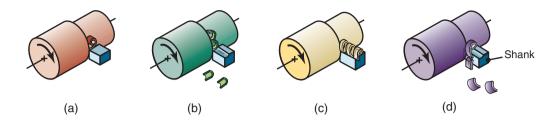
Chips produced in turning: (a) tightly curled chip; (b) chip hits workpiece and breaks; (c) continuous chip moving radially away from workpiece; and (d) chip hits tool shank and breaks off. *Source:* After G. Boothroyd.
